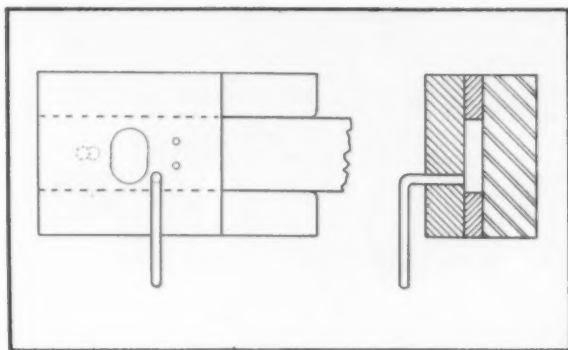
Square hook stop is merely inserted in hole in stripper plate.
